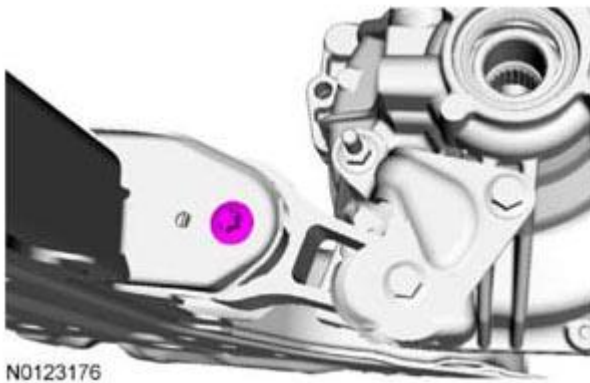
Identifying Transaxle Roll Restrictor Bolt
